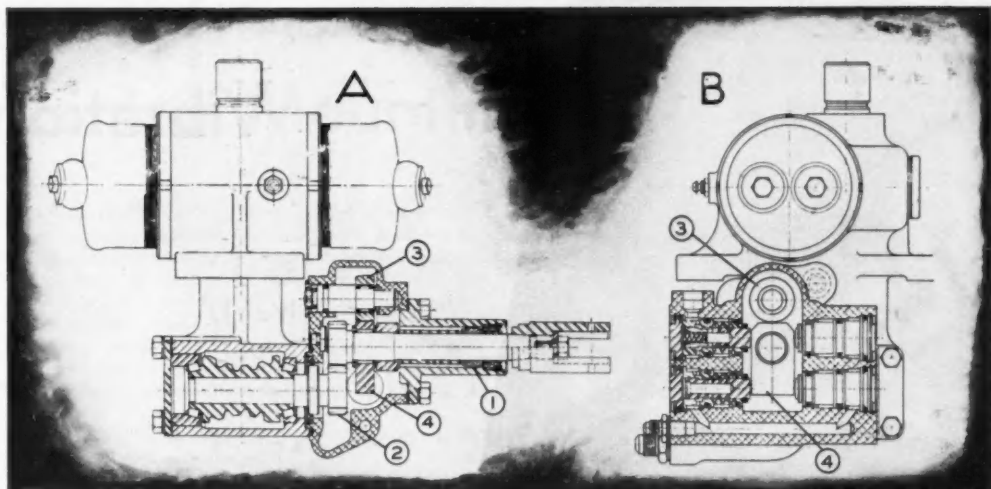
Cross section (A) and transverse section (B) through the steering gear. Spherical (1), mating spur gears (2), roller (3), valve operating block (4). Roller (3) which holds gears in mesh is mounted on an eccentric shaft permitting suitable adjustment by moving and locking an external lever. The two valves nearest roller (3) are reaction valves which serve to proportion power; the other pair are distribution valves which direct flow to the cylinders, then through the reaction valves.
